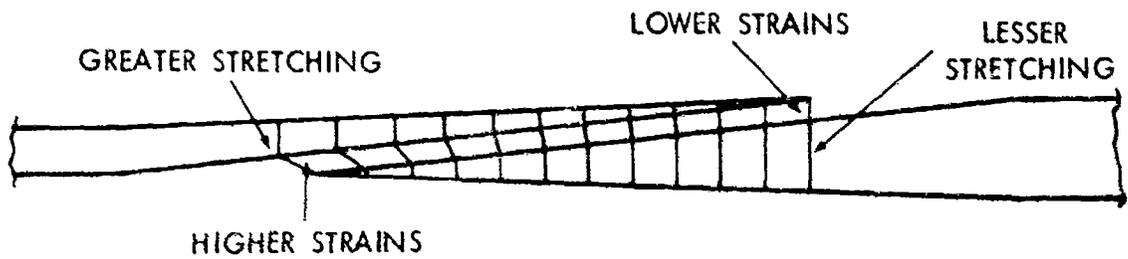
SHEARING OF ADHESIVE IN BALANCED JOINTS
